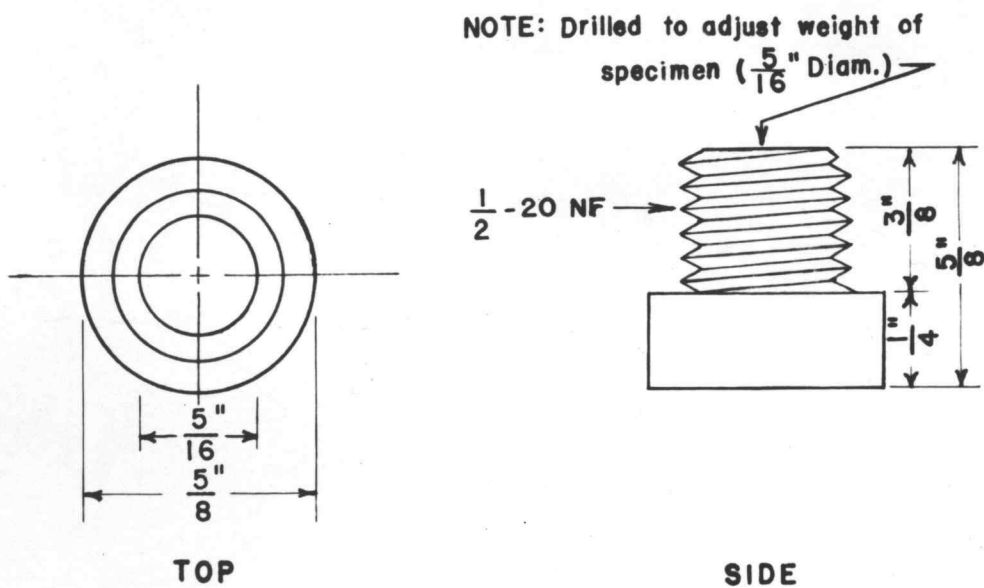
FIGURE II B. HEAVY METAL SPECIMEN DESIGN
